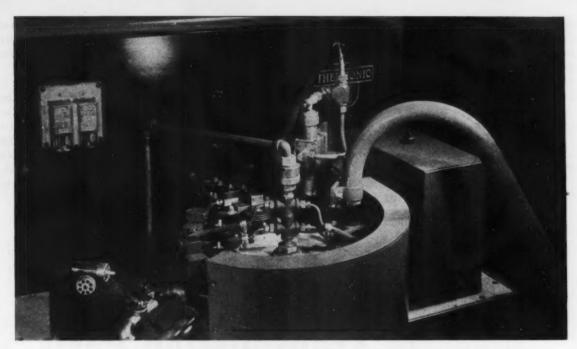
FIG. I—Eight-station rotary fixture for removing metal bases from faulty glass tubes. Shown at lower left are rejected tube and salvaged metal base.
